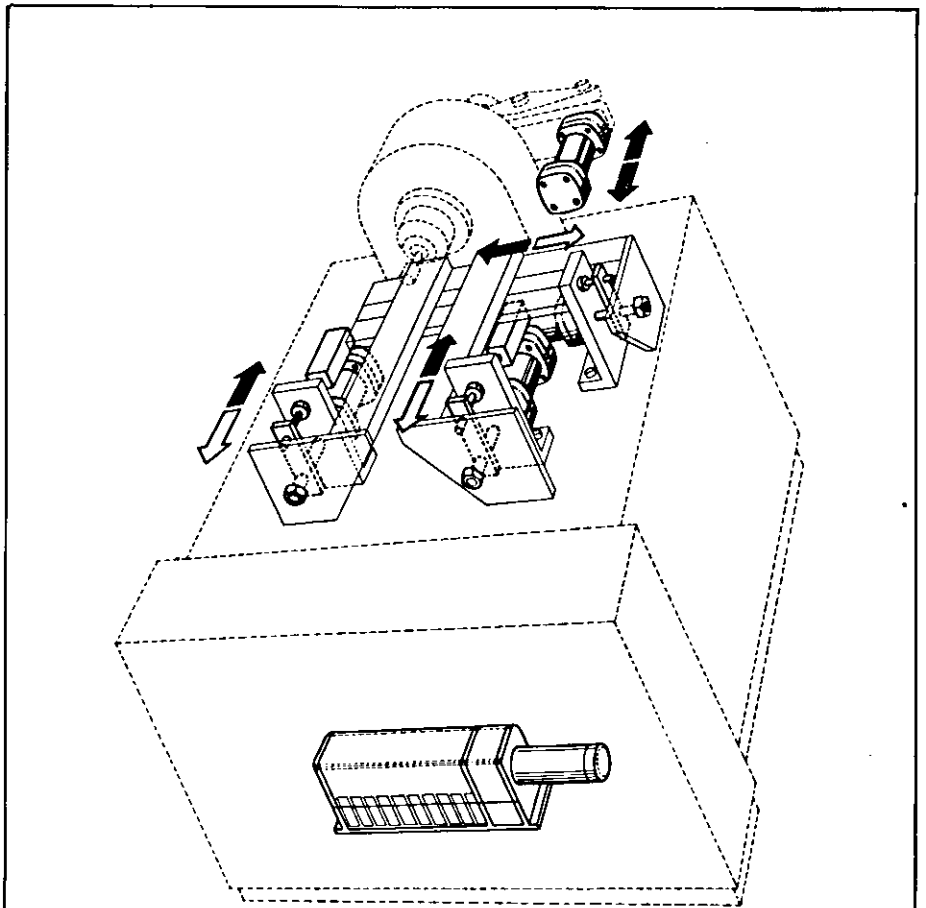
Finishing lathe for machining knob coverings by means of a diamond tool. Three pneumatic-hydraulic feed units are used to execute the operations of longitudinal turning, facing and chamfering. (Company photo: F. Rambold KG/FESTO)
